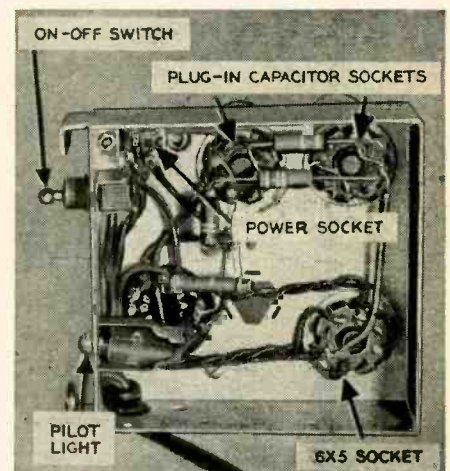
Parts layout and wiring on the underside of the power-supply chassis.
